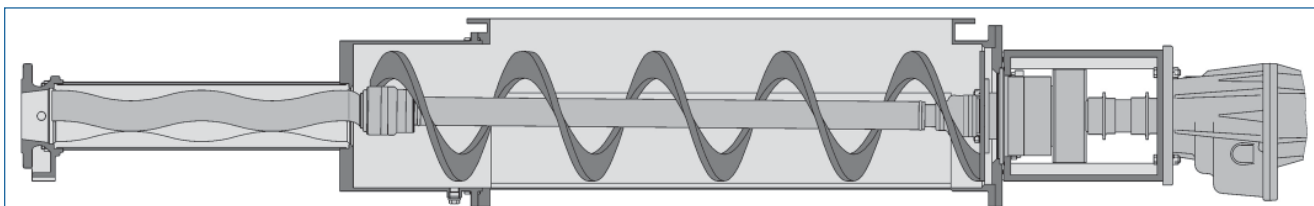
A true feed auger mechanism can be available in a PC pump by adding a ribbon auger attached to a plate fixed to the pump drive shaft behind the concentrically rotating universal joint.
